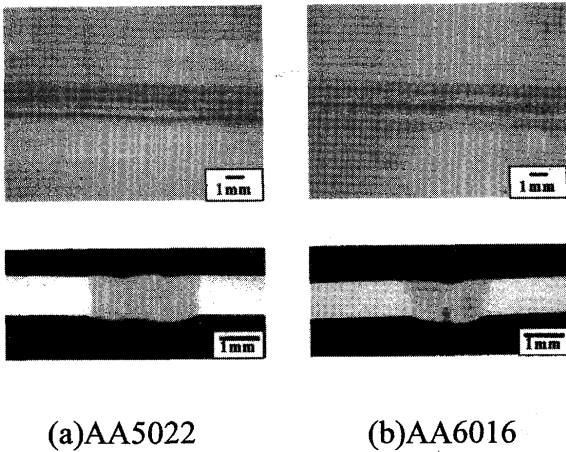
Typical bead surface and cross section in butt welding of AA5022 and AA6016 at a welding speed of 9.6m/min and 4.8m/min, respectively
